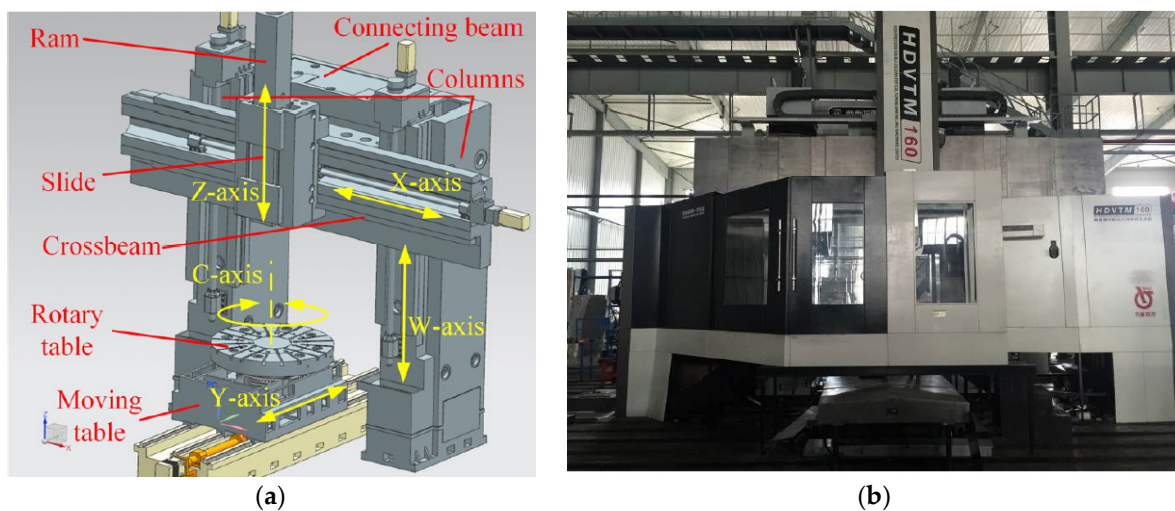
A heavy-duty vertical machining centre. (a) Machine tool configuration. (b) Picture of the machine tool.
